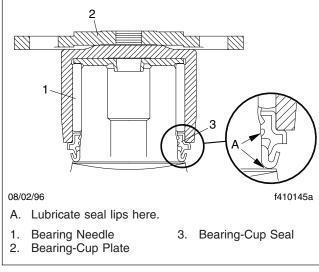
, Sectional View of a Full-Round Yoke U-Joint Bearing Cup
